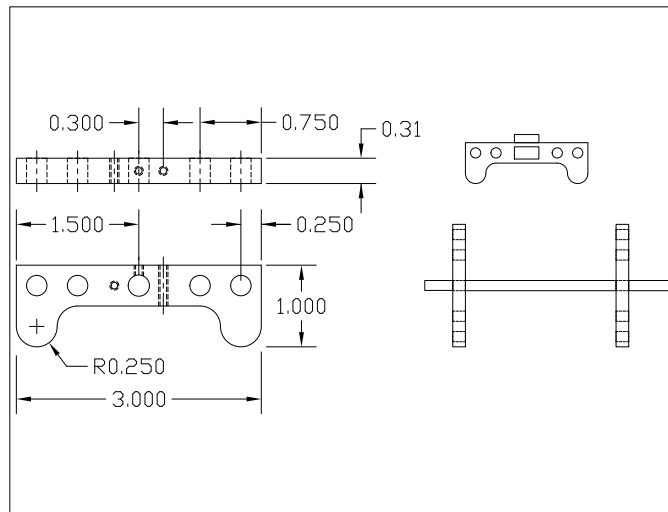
Drawing of holder for gaussmeter and hall probes, dimensions are in inches. The gaussmeter axial probe uses two such holders, being mounted in the central hole as shown in the bottom right. Additional large holes can hold threaded rods to set distance and squareness between the two holders. Hall probes are mounted on the center of the top and one side face, as seen by the two rectangles in the top right diagram.
